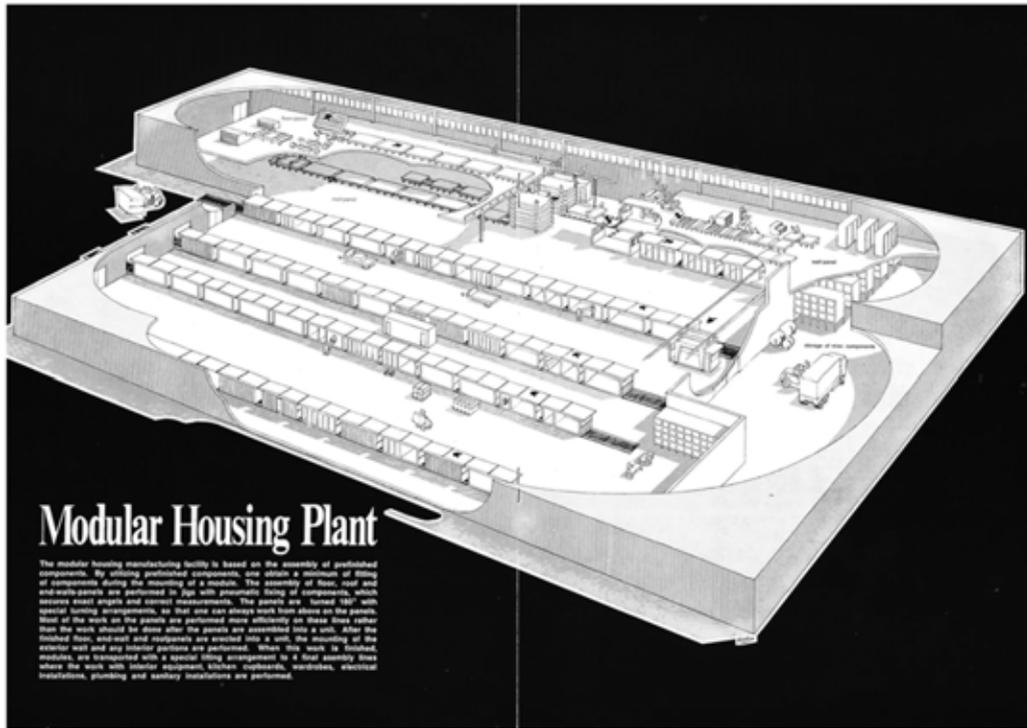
Moelven conveyor belt assembly. Moelven Industrier A/S, 1973.
